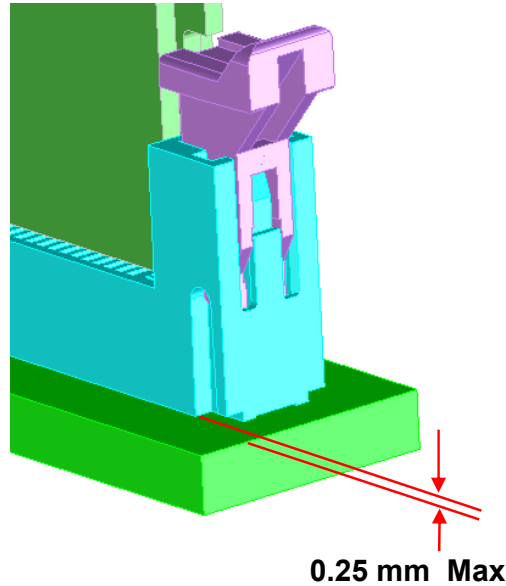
Maximum Clearance between PCB and Memory Connector after Press In
